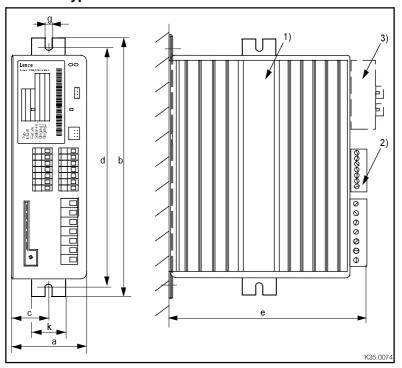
Dimensions 8211 - 8214: Standard assembly
